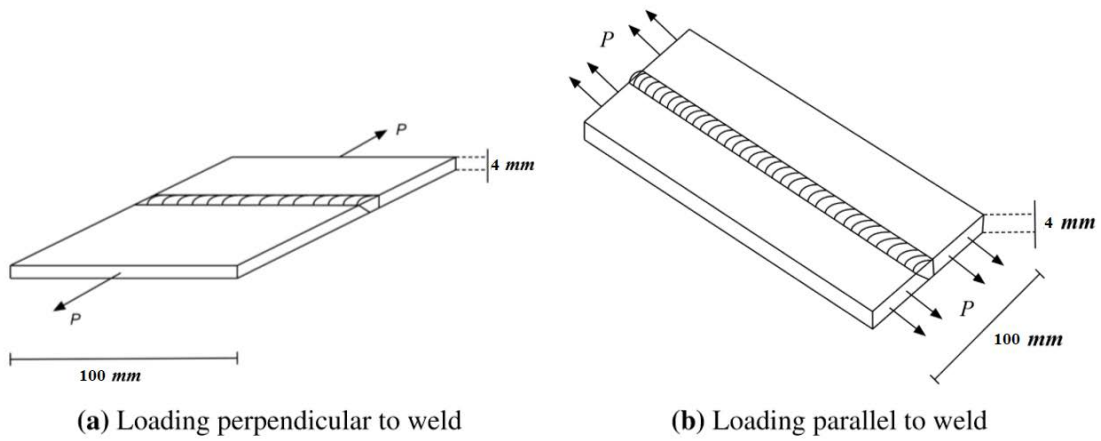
Assumed dimensions of the AA6082 sheets subsequent to GMA and FS welding, where the loading is perpendicular and parallel to the weld, respectively.
